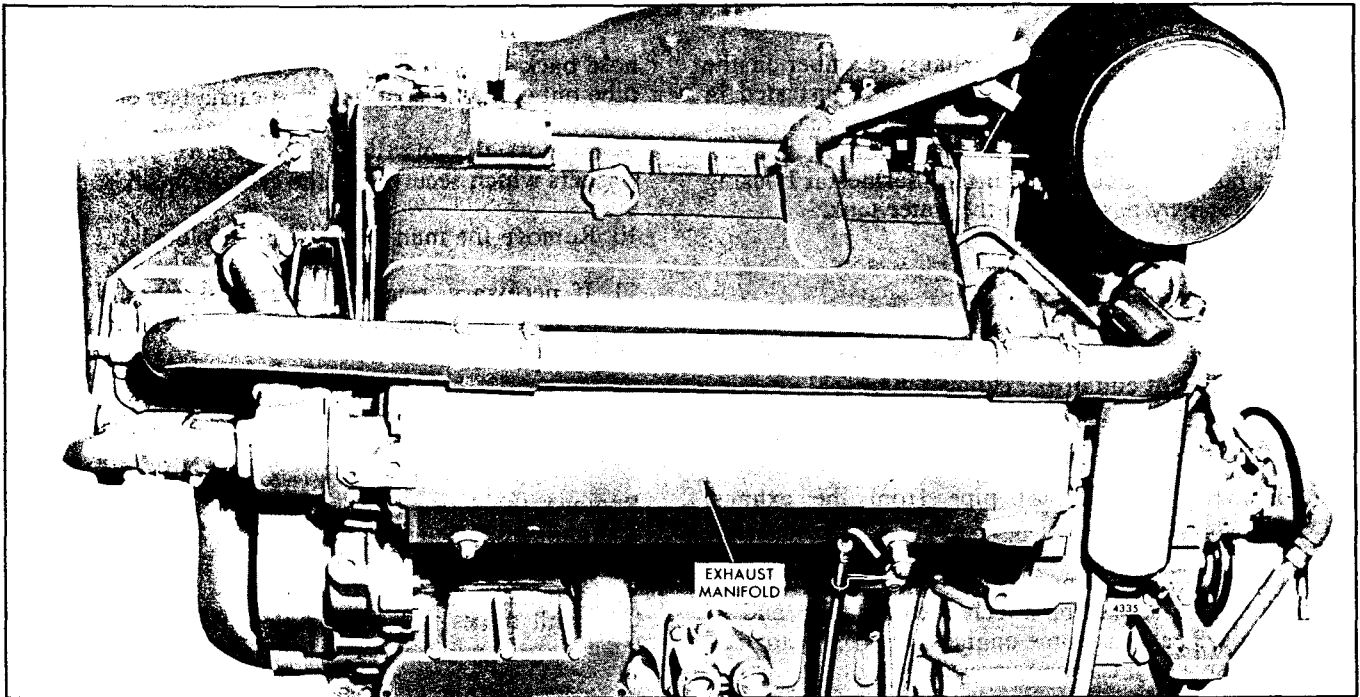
Typical Water-Cooled Exhaust Manifold Mounting (8V Engine)
